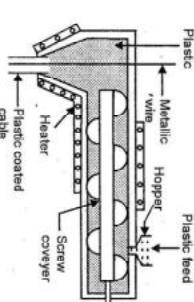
Moulding of insulated electric cable by extrusion moulding vertical
